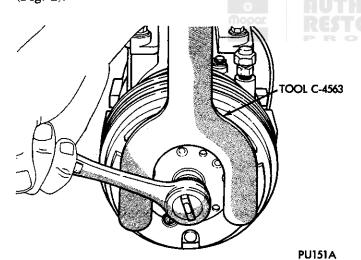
Removing Clutch Retaining Nut, C-171 Compressor
